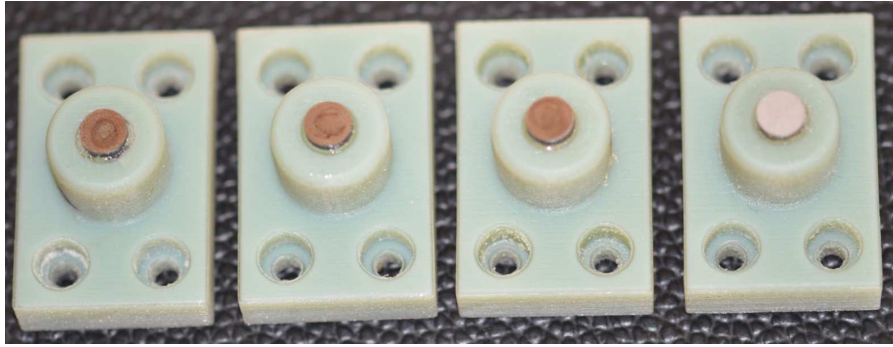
Steel surfaces machined by  $\mu$ EDM to reproduce the different topographies of the different mold surfaces.
